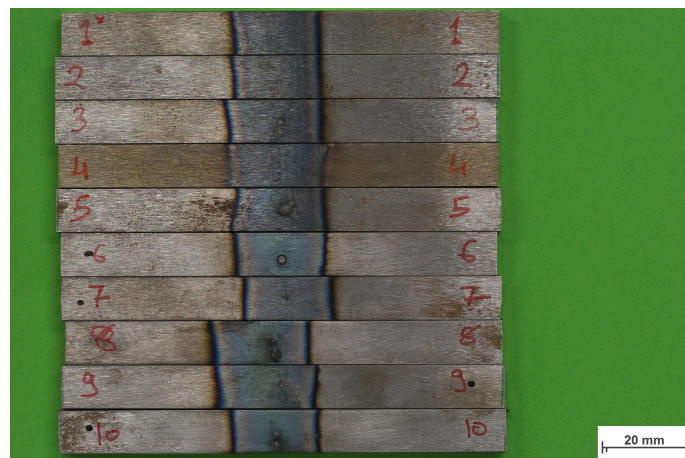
Gleeble-PWHT (G) samples after post weld heat treatment using gleeble.
